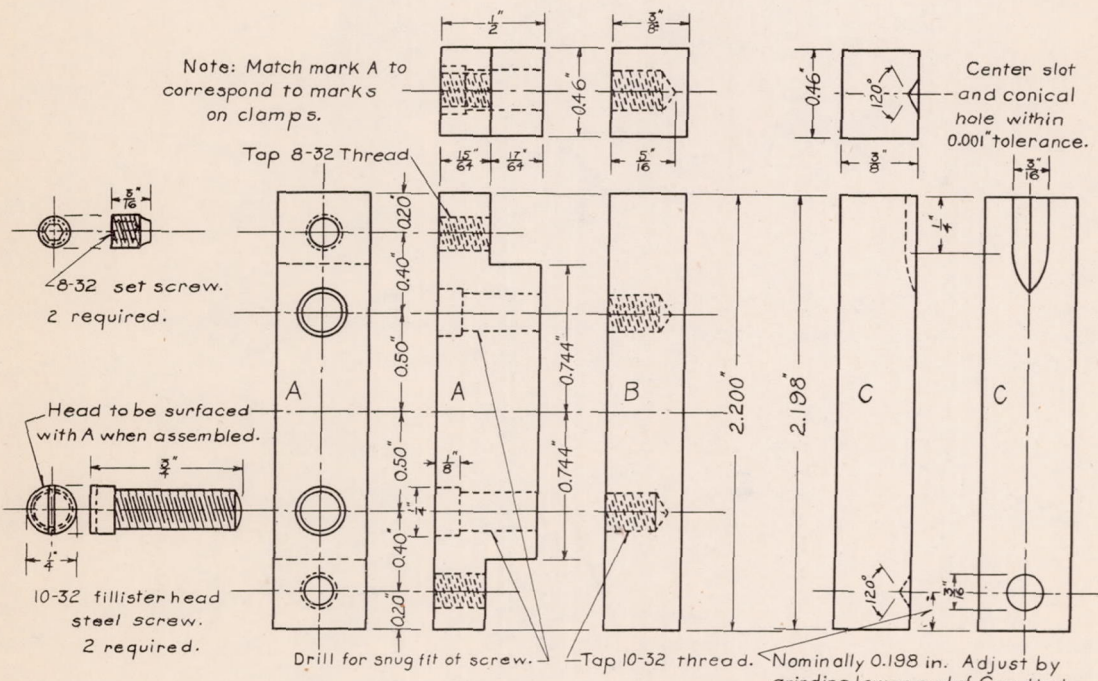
Steel guide fixture for compressive tests of thin sheet metal.
